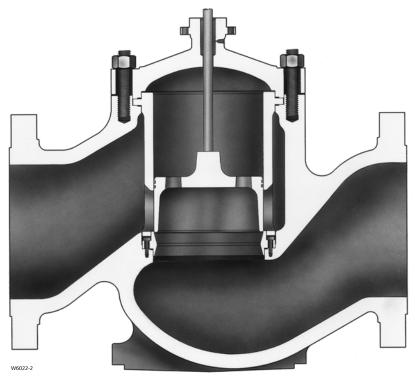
Fisher EWT-2 Valve with Whisper Trim III D3 Cage, Baffle, and Lower Metal Piston Ring
